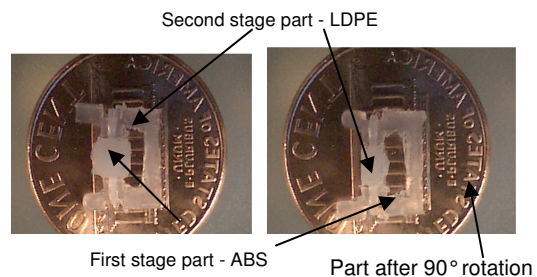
TWO CONFIGURATIONS OF THE IN MOLD ASSEMBLED REVOLUTE JOINT WITH MESO SCALE FEATURES DEMONSTRATING ROTATION OF THE JOINT
